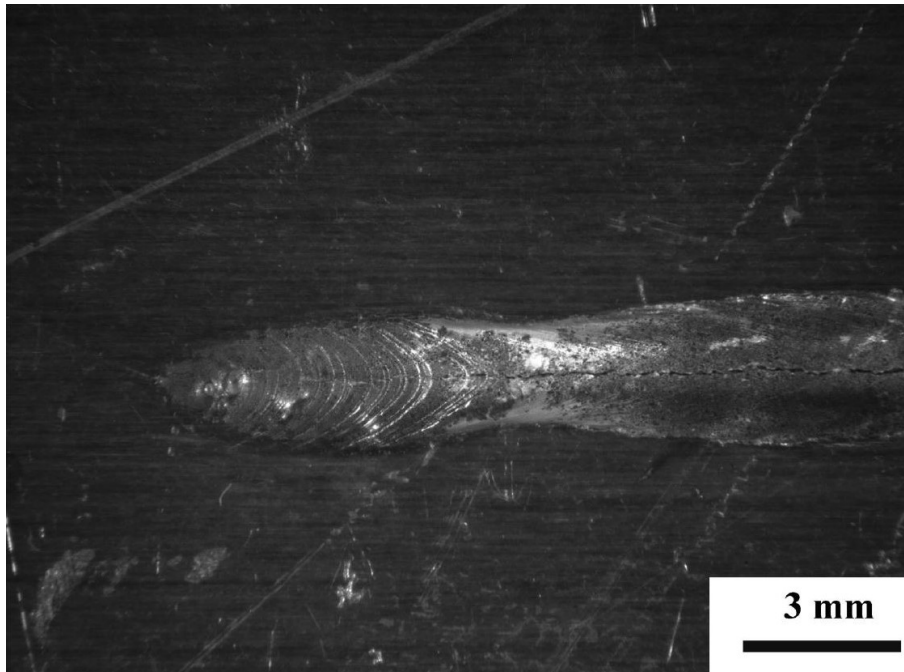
Hot cracking in Alumunim alloy welding[11].
